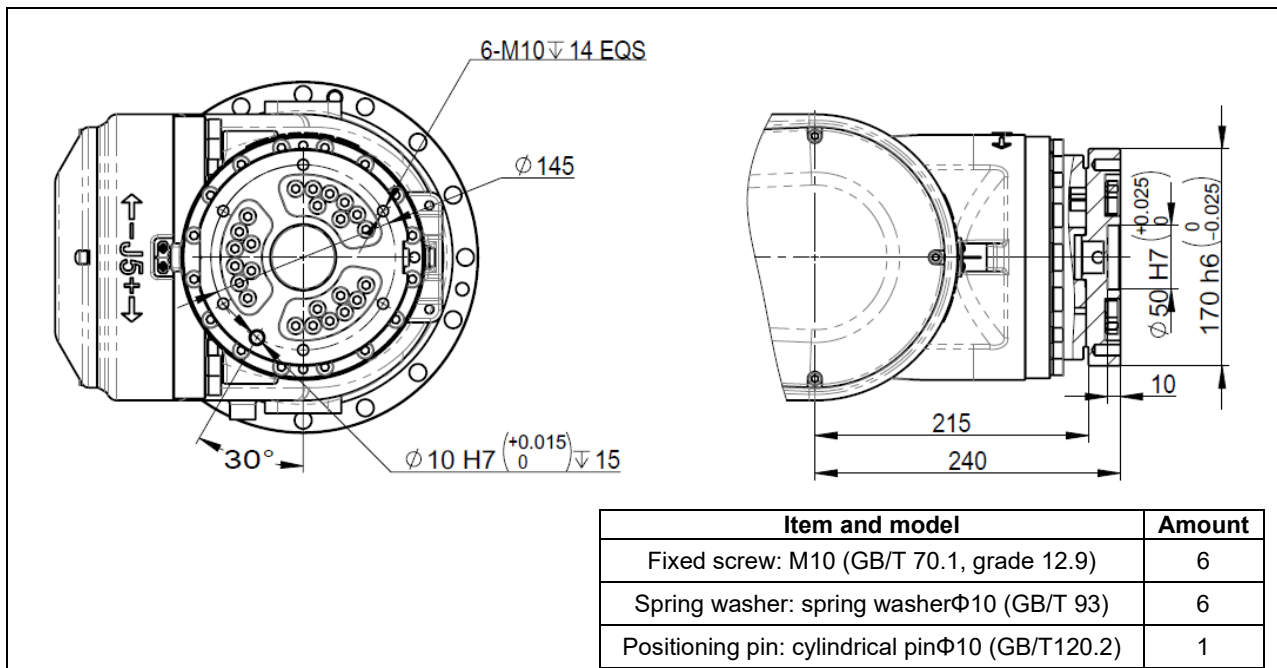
End flange mounting dimension (ER160B-3200, ER220B-2650)
